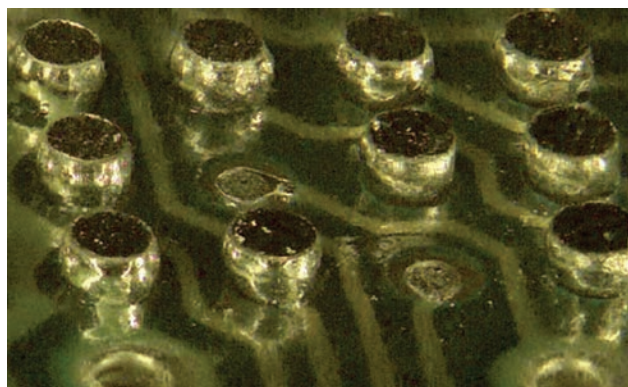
After blowing away the residue of the solder resist, two missing balls can be seen.
